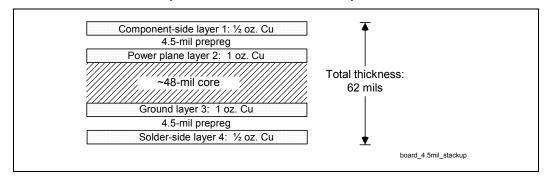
Board Construction Example for 60 Ω Nominal Stack-up
